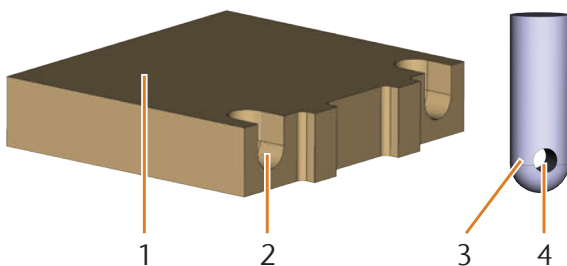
BLANK AND PINS FROM THE CALIBRATION SET
